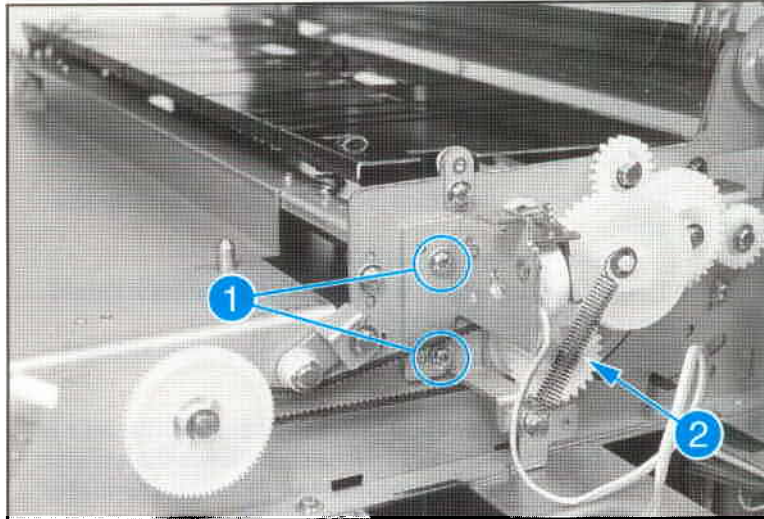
SL1 (1st Paper Feed Solenoid) Removal
